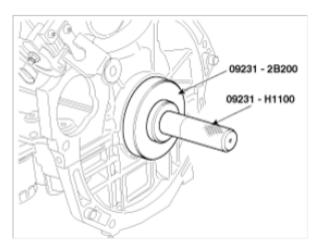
Tapping Rear Oil Seal Using SST (09231-H1100 And 09231-2B200) Courtesy of HYUNDAI MOTOR AMERICA
